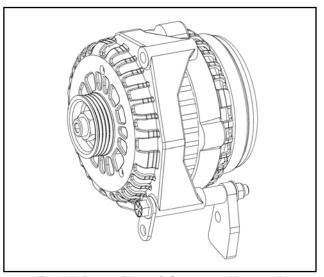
(Lower Plates & Spacer on Alternator)
